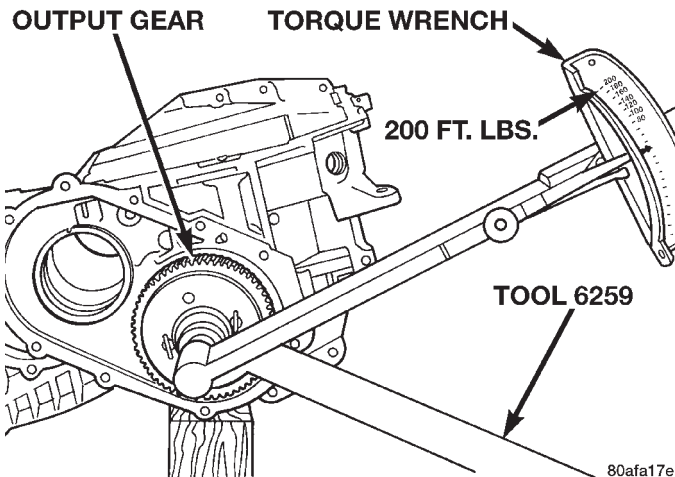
Tighten Output Gear to 271 N·m (200 ft. lbs.)
